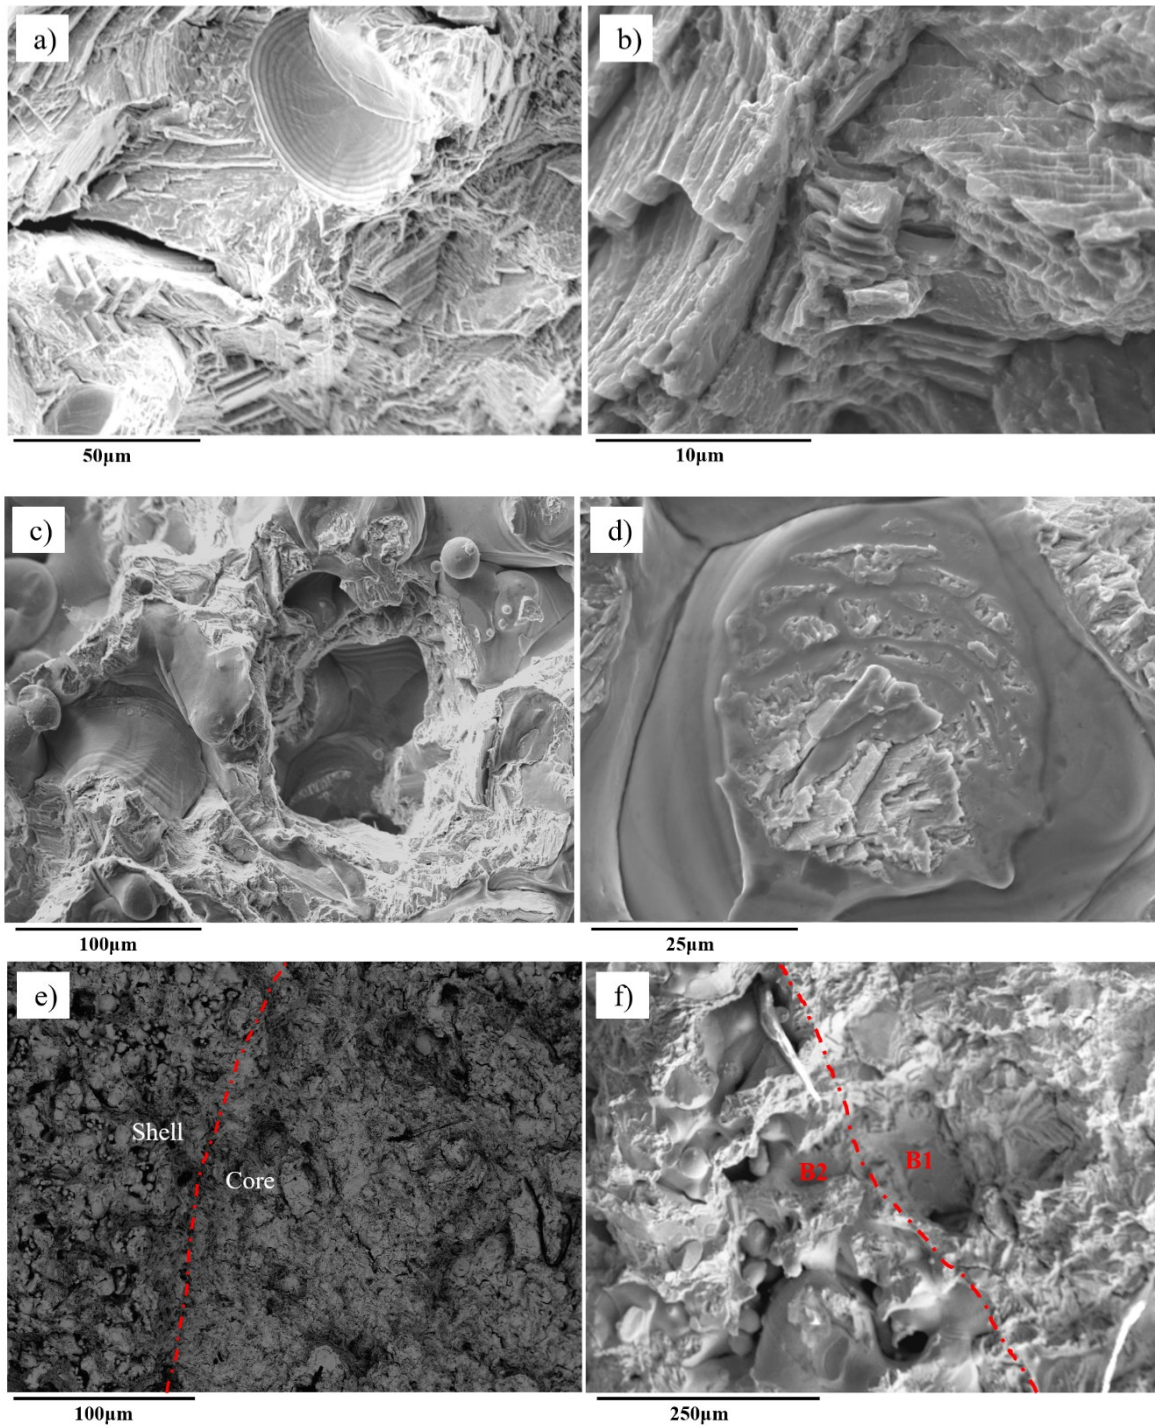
SEM micrographs of the fracture surface of the selective laser melted CoCrMo alloys obtained after the tensile test. a) fracture surface of B1 sample, b) the magnified fracture surface of B1, c) fracture surface of B2 specimen, d) the magnified fracture surface of B2, e) fracture surface of B1+B2 sample showing the border of core and shell, f) the magnified fracture surface of B1+B2 sample, indicating B1 and B2 border.
